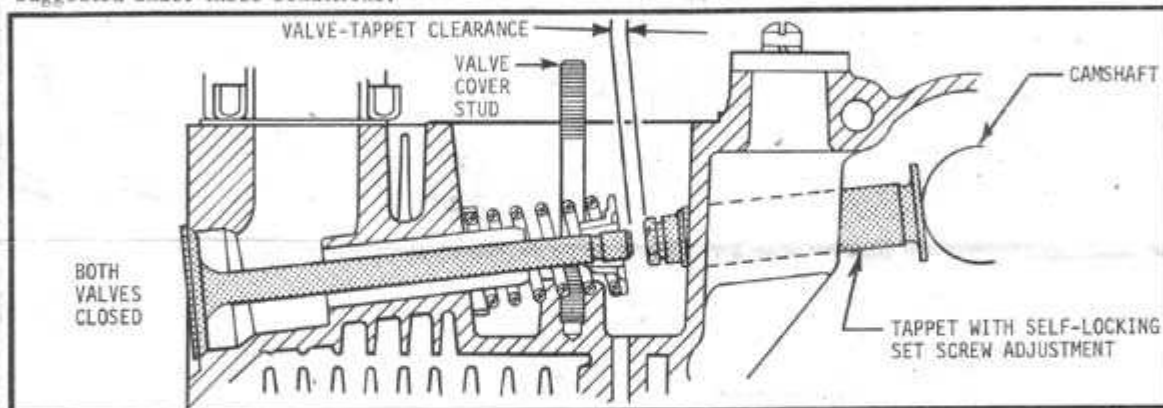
CUTAWAY VIEW SHOWING VALVE - TAPPET CLEARANCE
